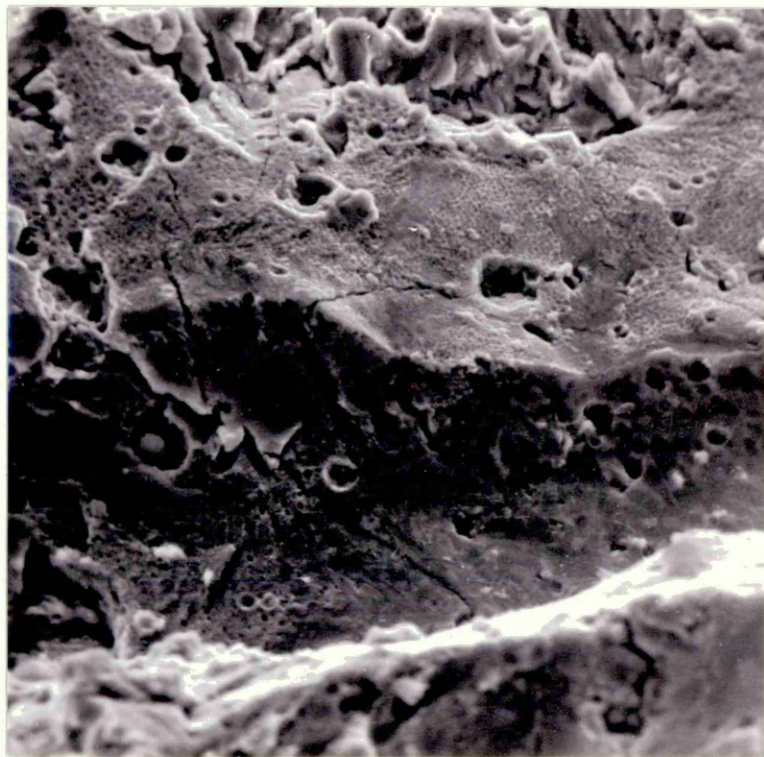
Weld Metal: Transition Region between Environmental Crack and Fast Fracture
